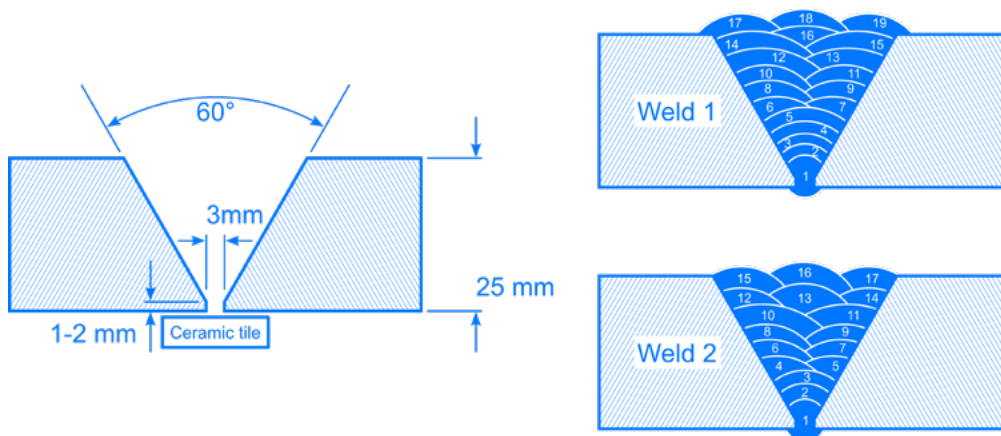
Schematic of the weld geometry and welding sequence for the samples used in this study.
